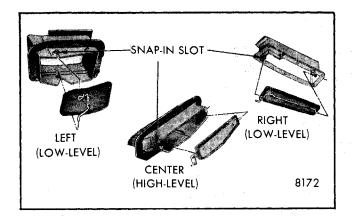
High-Level and Low-Level Air Outlets and Doors - E Styles
